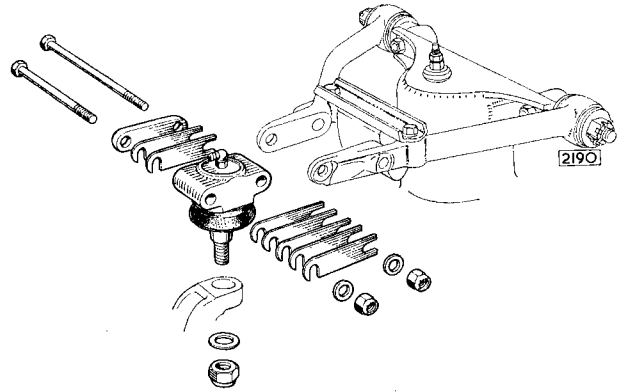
Exploded view of upper ball joint and castor adjustment shims.
